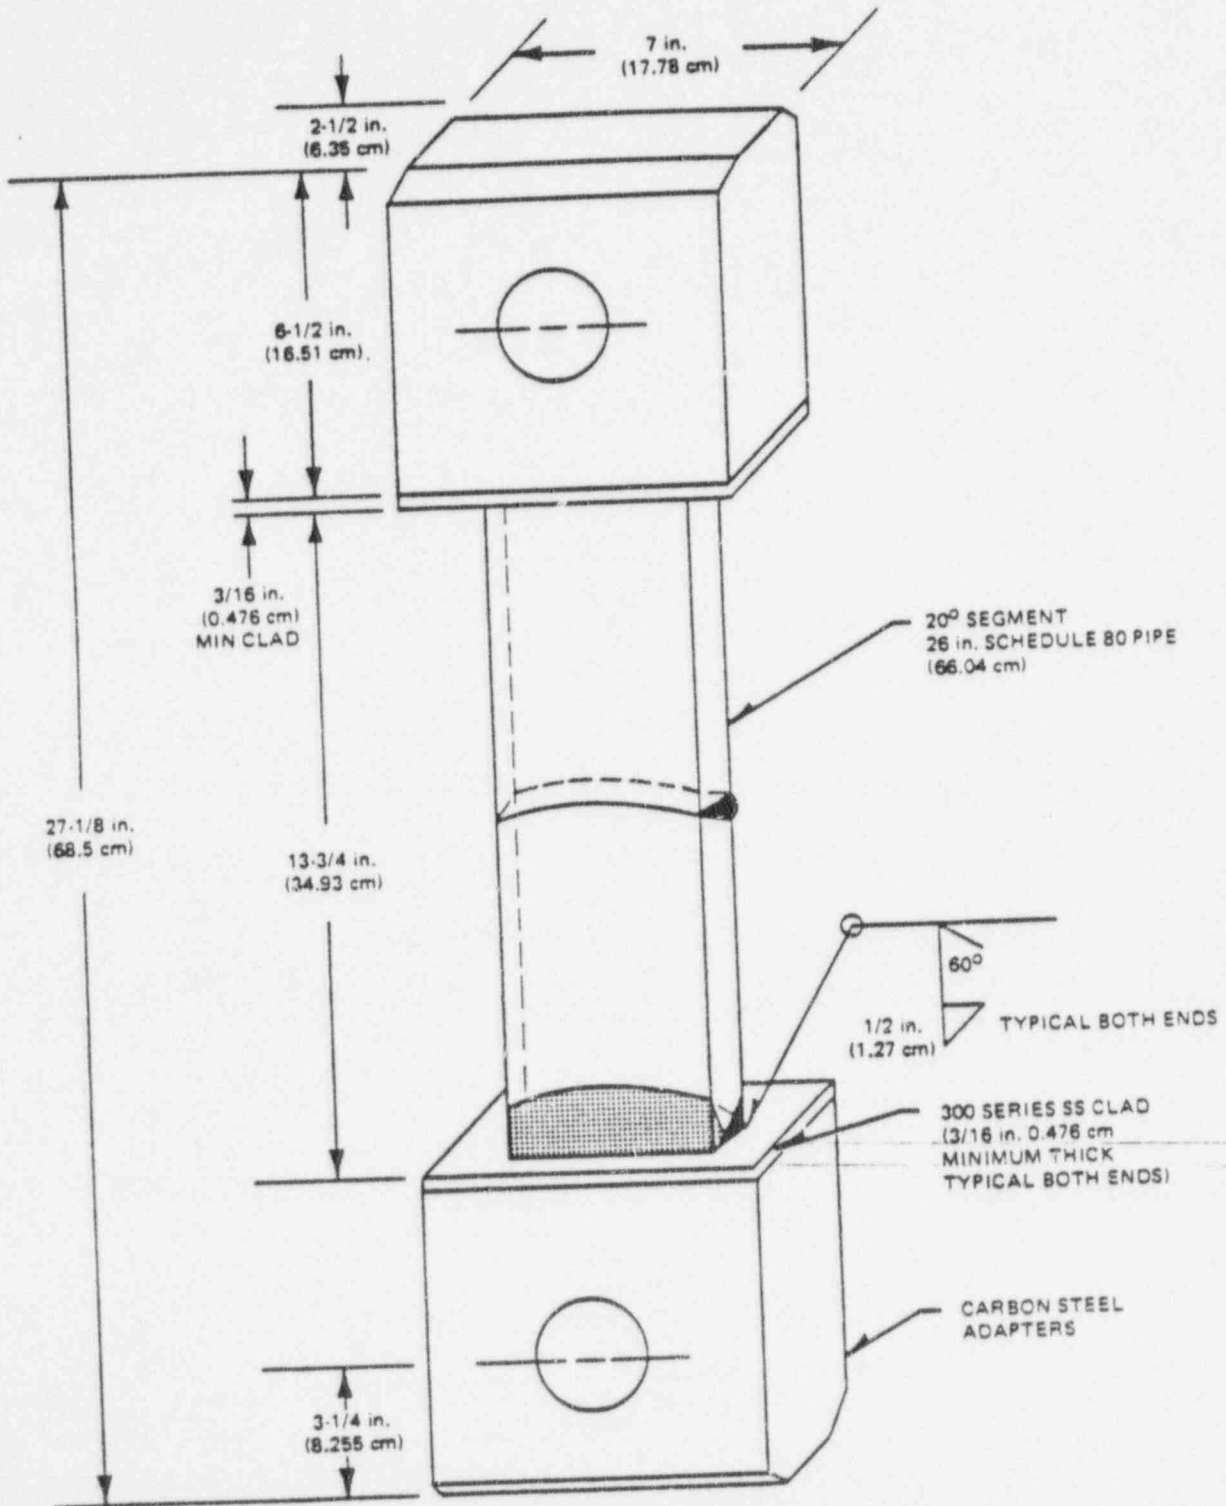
66-cm (26-in.) Schedule 80 Pipe Test Specimen with End Pieces
